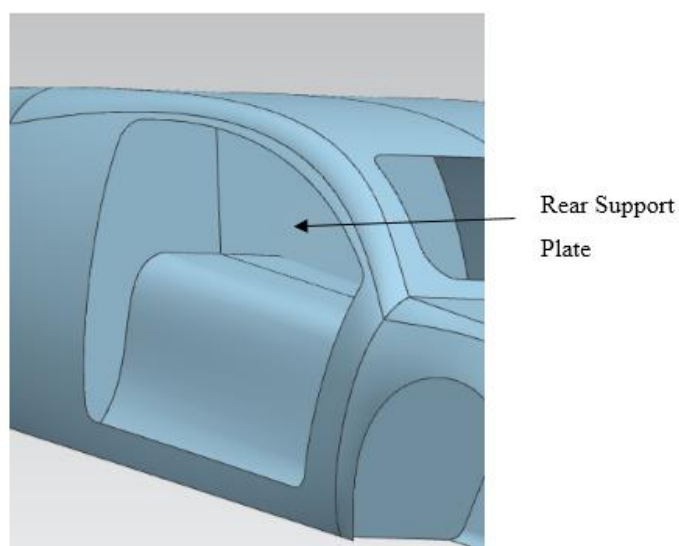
Front shroud illustrating suspension mount and support plate
